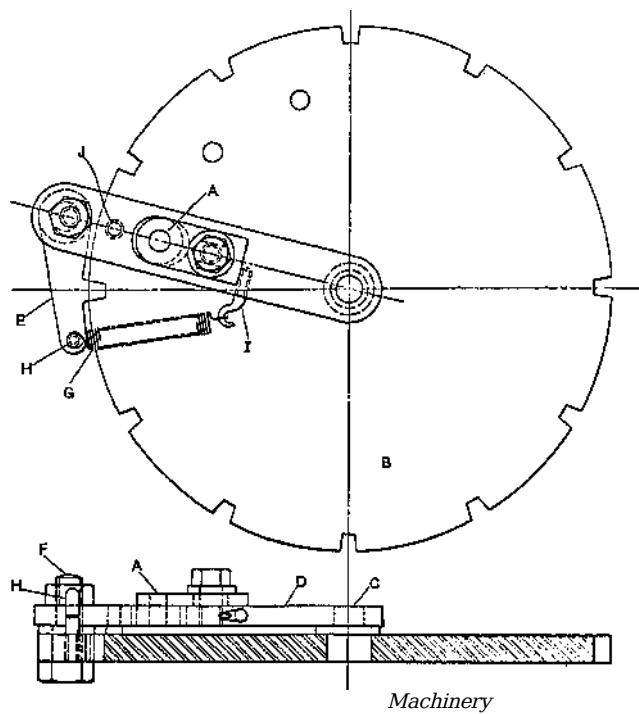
Jig for Drilling Holes in Power Press Dial Plates
